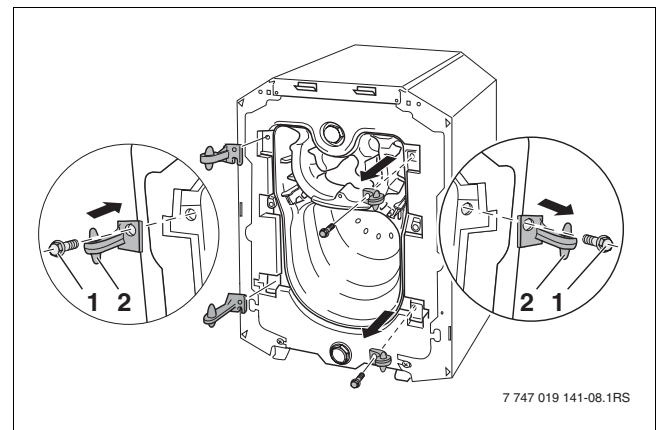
Reversing the burner door (boiler heat exchanger attachments)
